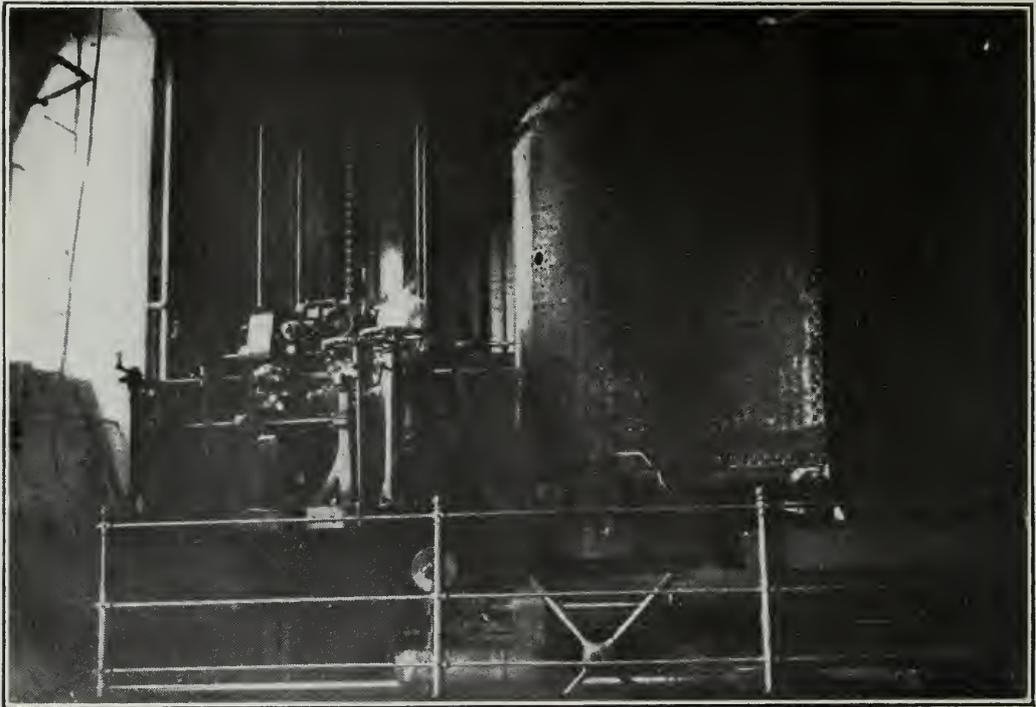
MAFFEI-BUILT SPECIAL BOILER-DRILLING PLANT.
